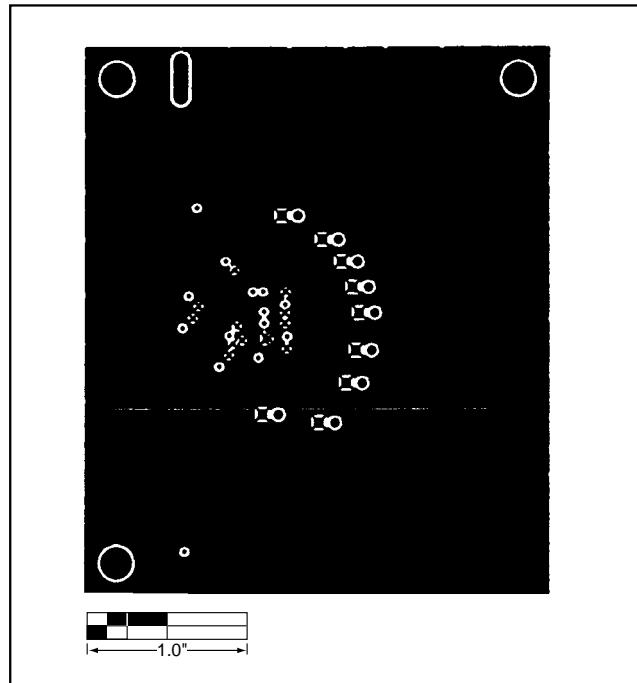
MAX3680 EV Kit PC Board Layout—GND Plane
